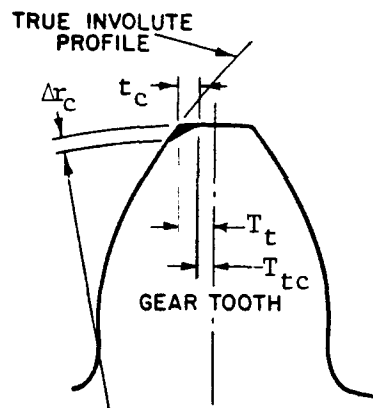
Tip Chamfer on a Spur Gear Tooth (symbols explained in text) (5)
